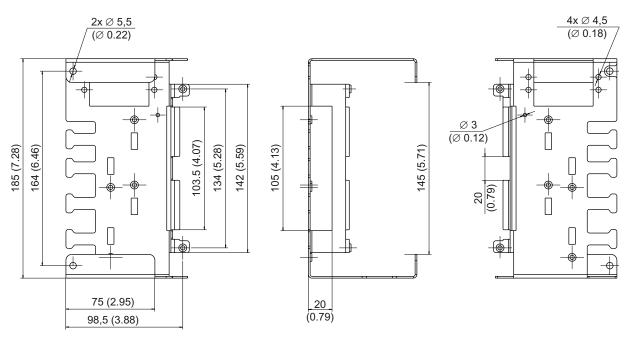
Dimension drawing, screening kit, frame size FSC, all data in mm (inches)
